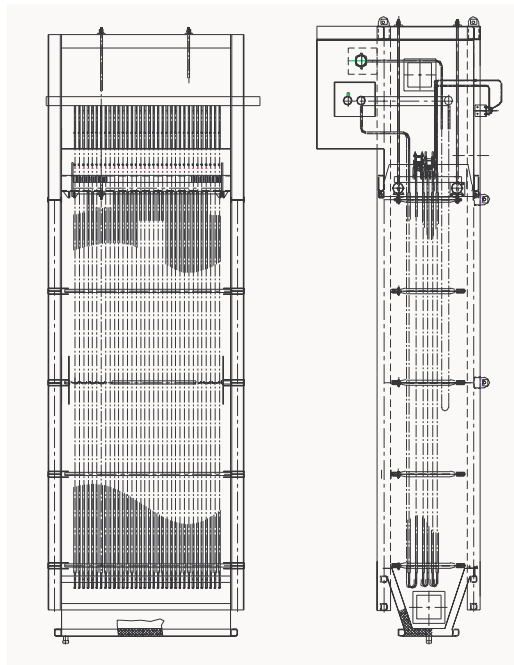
Vertical Tube/Horizontal Gas Flow Arrangement
